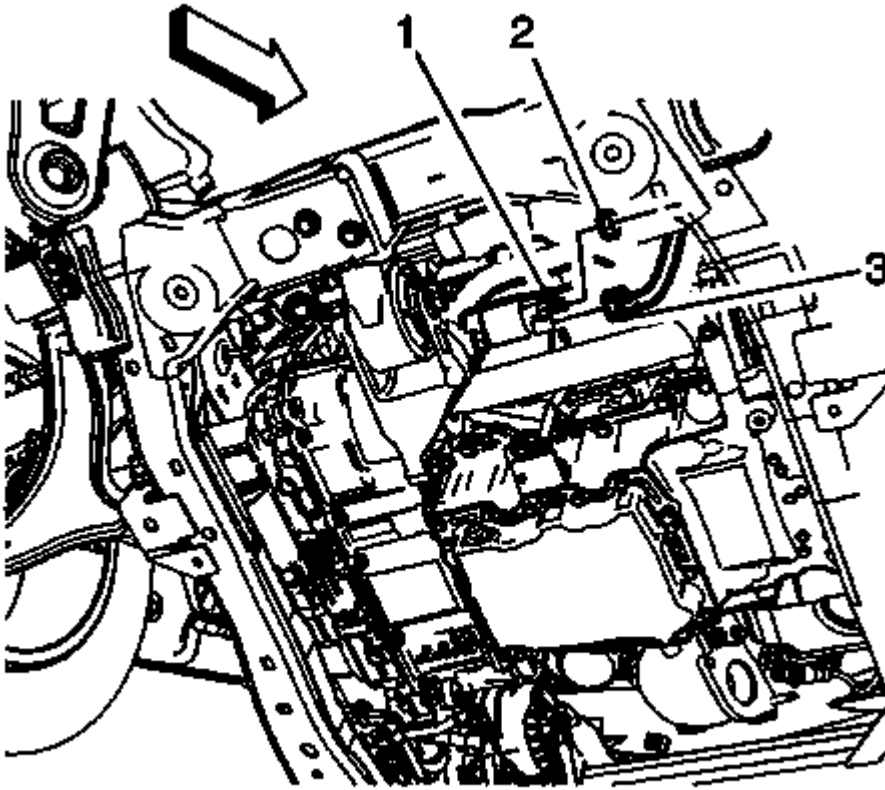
Battery Positive Cable Terminal And Engine Harness Connector
